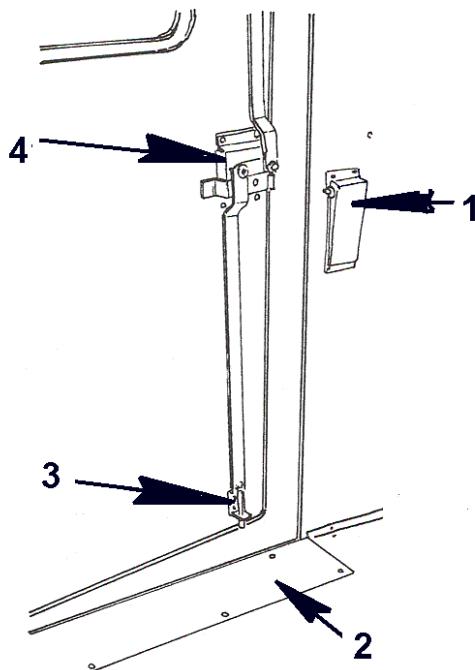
Wheelchair Access Door Latch Assembly (Optional)
